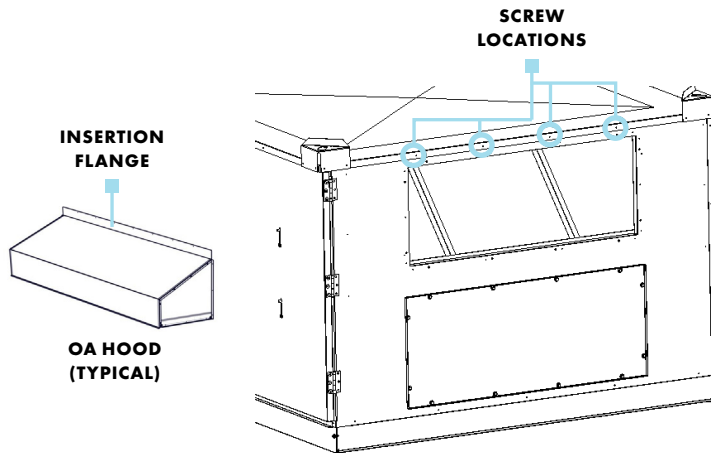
OUTSIDE AIR HOOD (TYPICAL)
